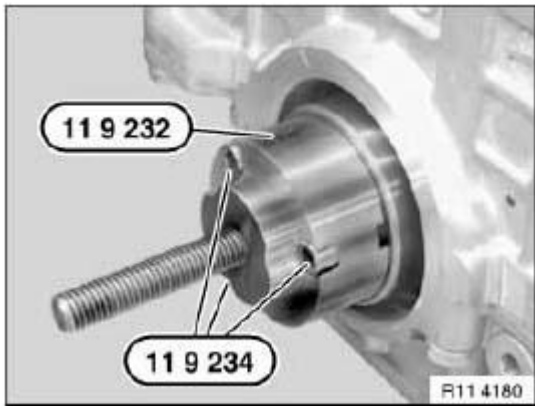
Identifying Special Tool (11 9 232, 11 9 234)
